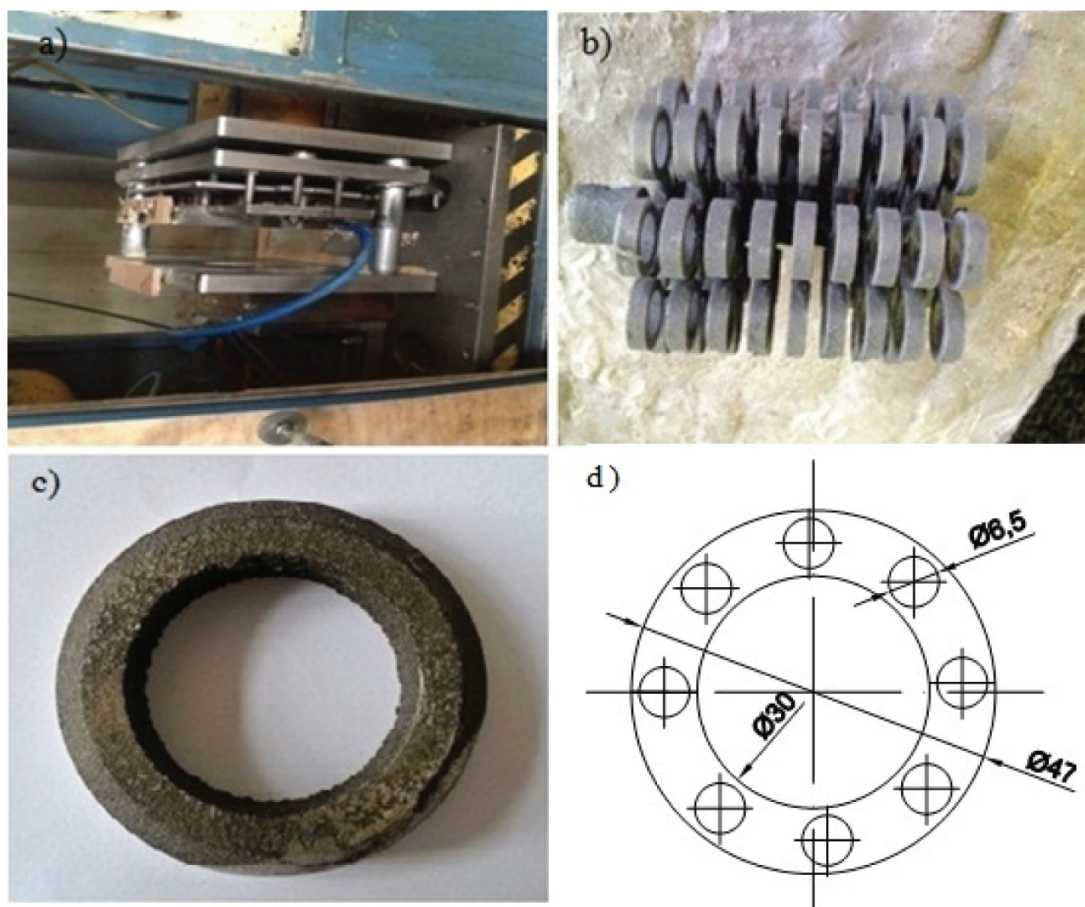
(a) Prepared mould, (b) moulded parts, (c) valve seat insert, (d) representative of specimen removed from valve seat insert
